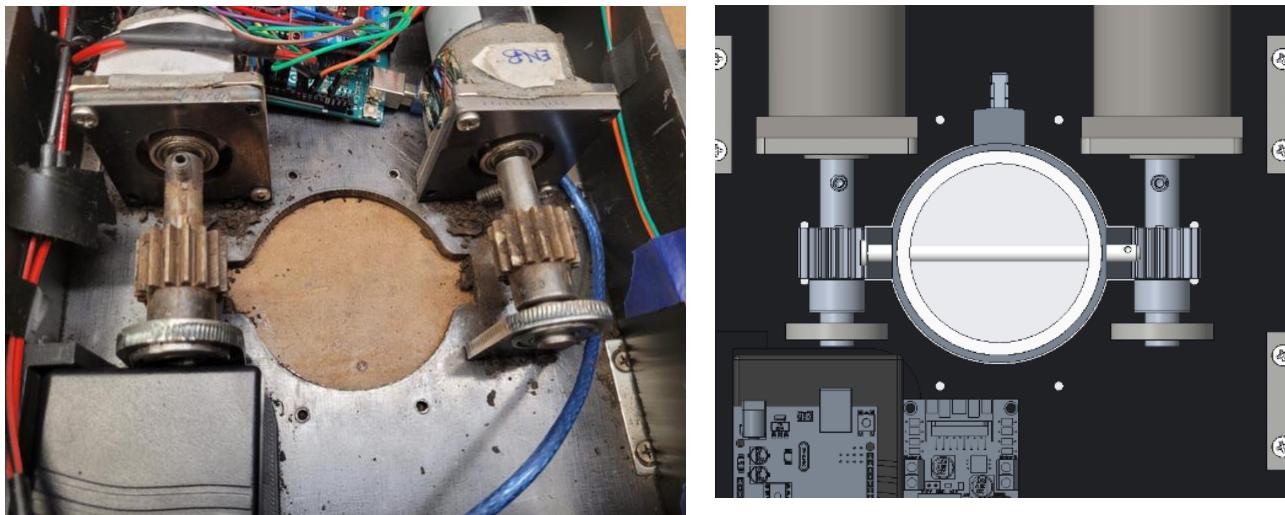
CAD vs. Manufactured Base Plate / Mounts
